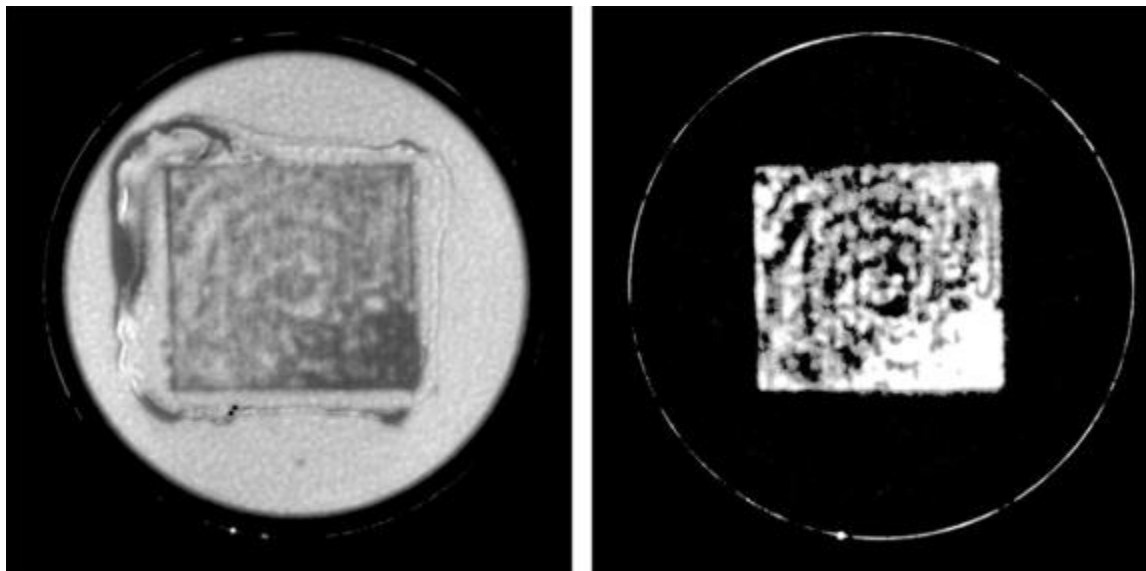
Example of an Inspection of a Nickel Faceplate-to-Piezo-Element Solder Bond to Assess Joint Integrity (SN3)
